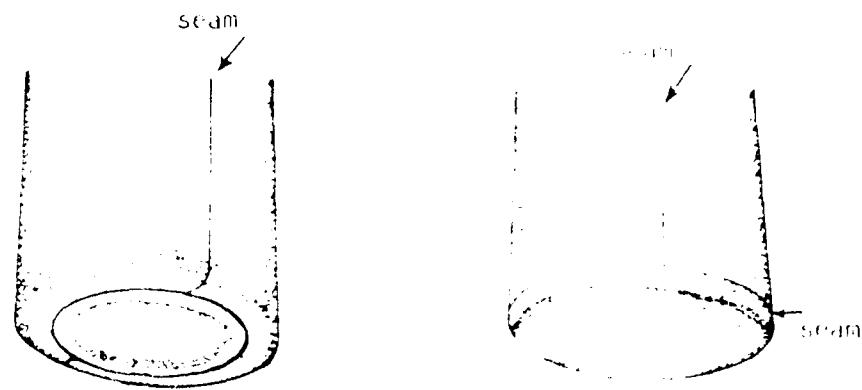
Post Bottom Mold (left) and Cup Bottom Mold (right).
